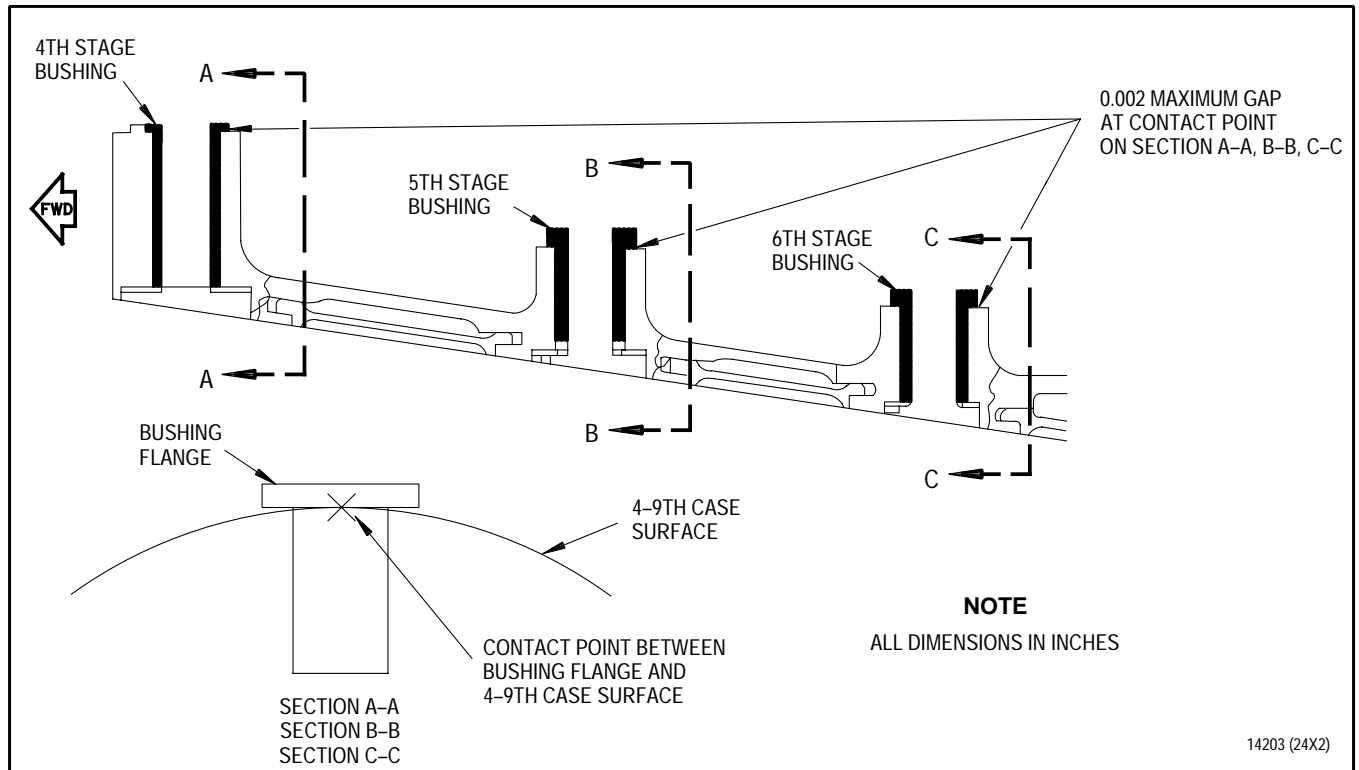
A. Variable Vane Outer Bearings (Bushings) - Seating Inspection
